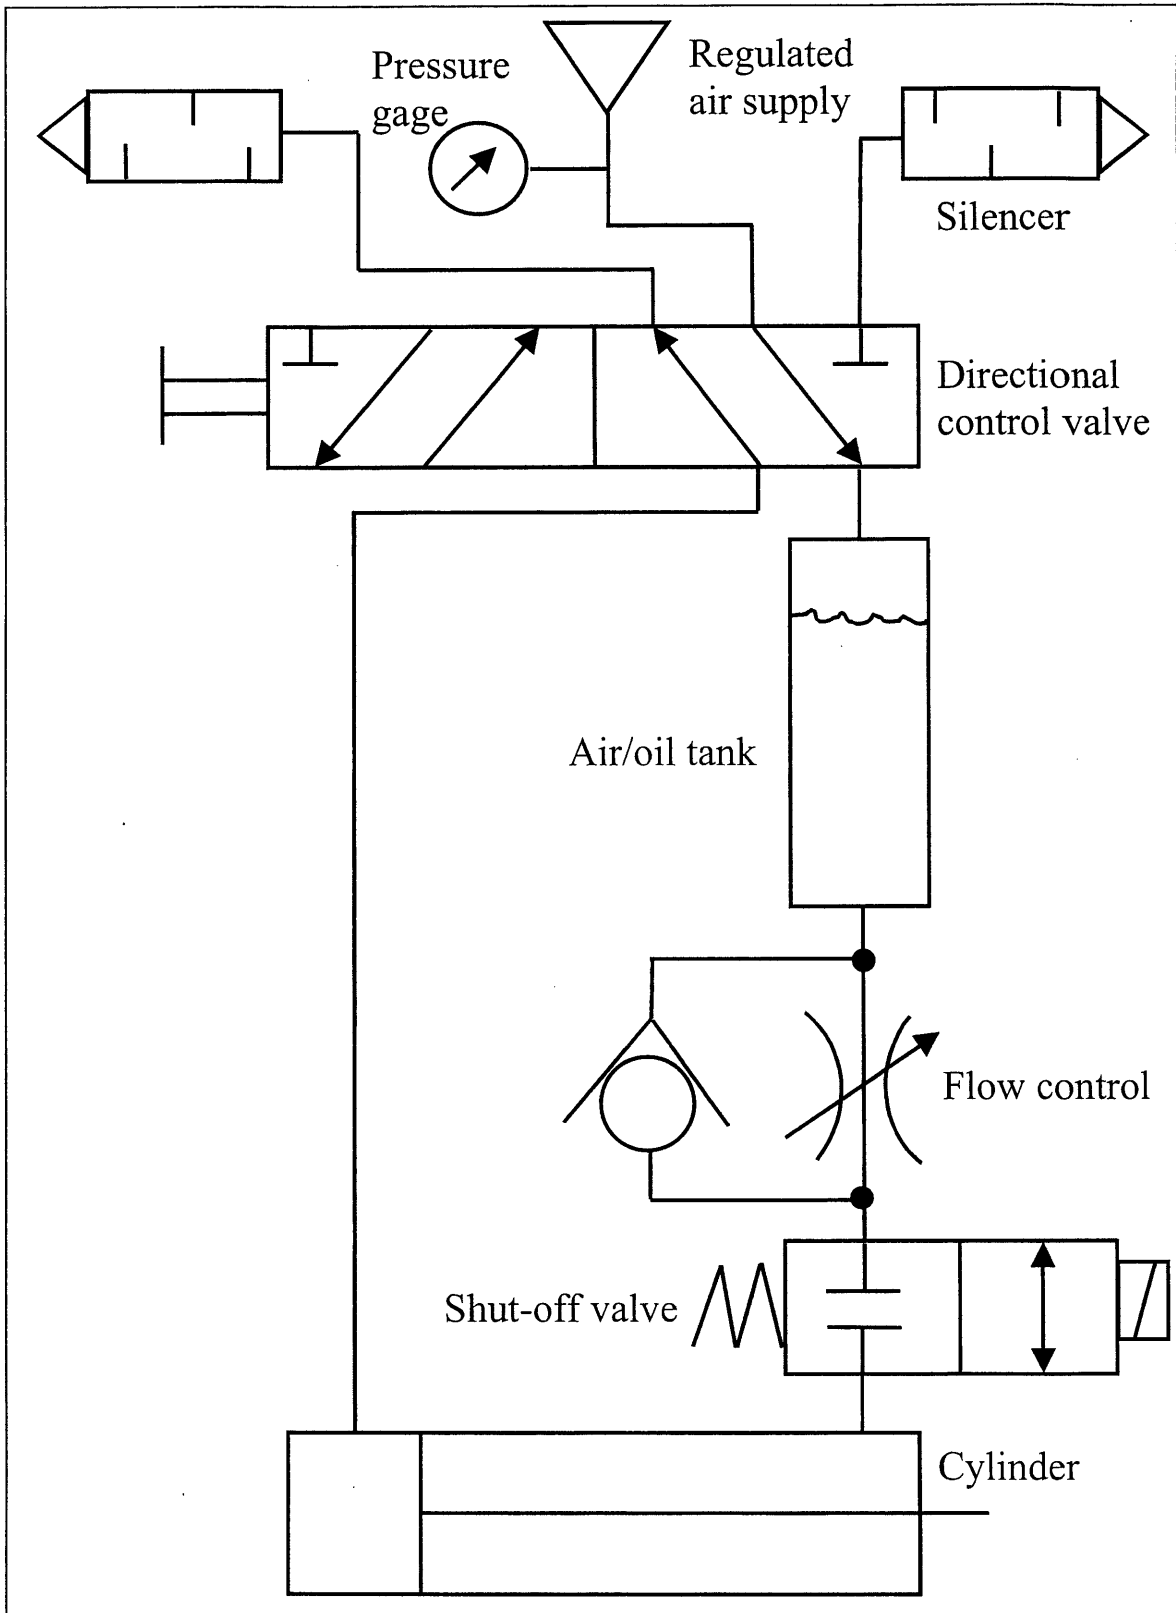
Hydro-pneumatic circuit layout of the prototyping press
